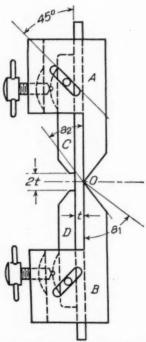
Clamp Arranged So that Bending Produces Nothing but Stretching in Test Piece.
